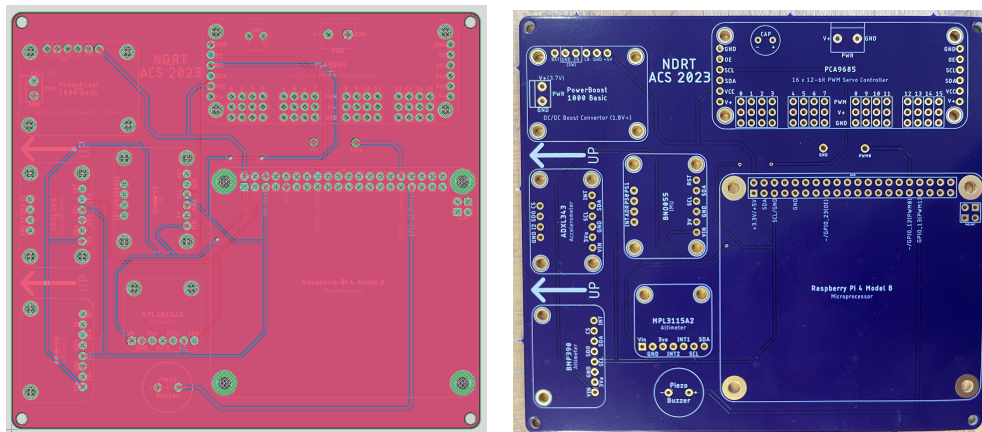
PCB Layout Diagram (left) and fabricated PCB (right)
